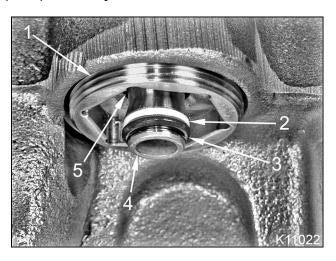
Injector oil inlet installed in high-pressure oil manifold
